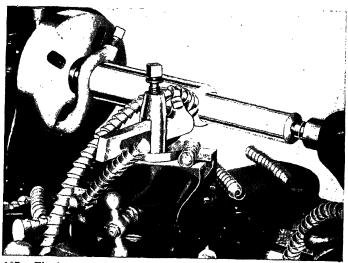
The long curly chips of a ductile material. The work is caused to rotate by a dog engaged in the faceplate. (South Bend Lathe Works.)
